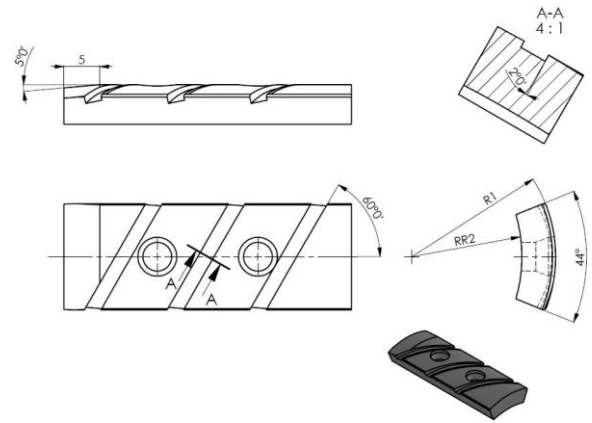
Cutting-smoothing guiding insert with inclination of the cutting edge  $60^\circ$
